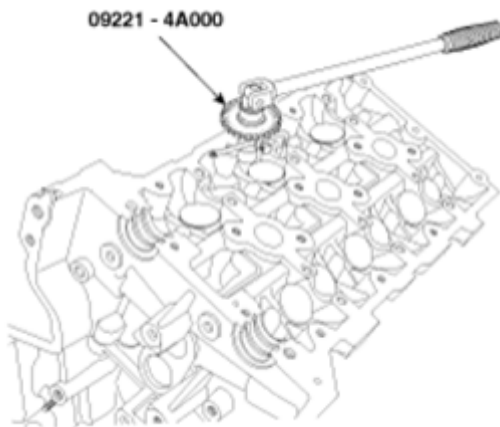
Tightening Cylinder Head Bolt Using SST (09221-4A000)
